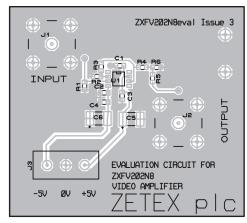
Evaluation circuit top copper layout (overall dimensions 2.5 x 2.25 inches)
